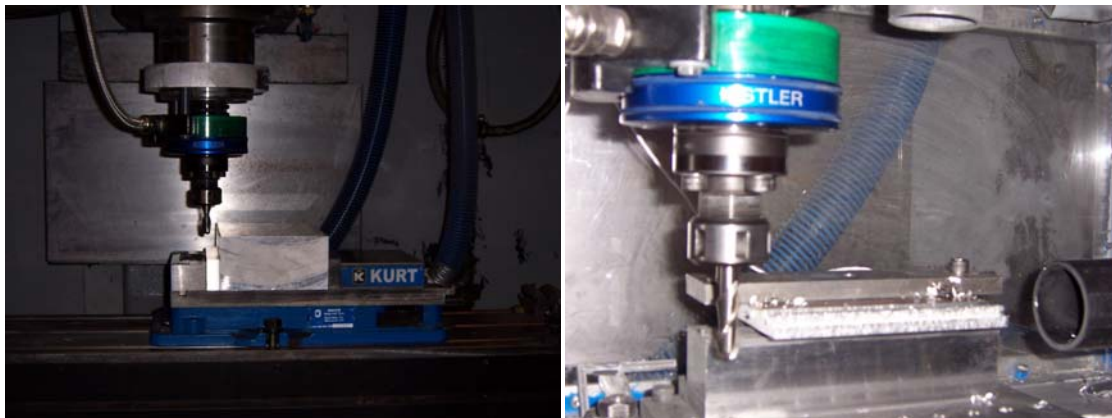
Dynamometer cutter alignment testing with aluminum
